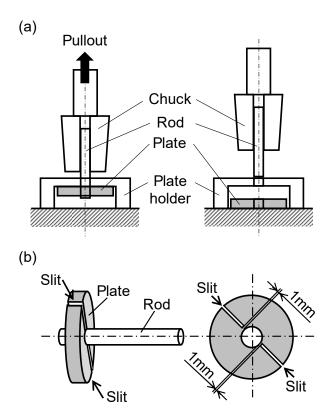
Pullout (drawing) test of indented rod away from plate after indentation plastic joining of rod and plate: (a) die arrangement, (b) slits in plate.
